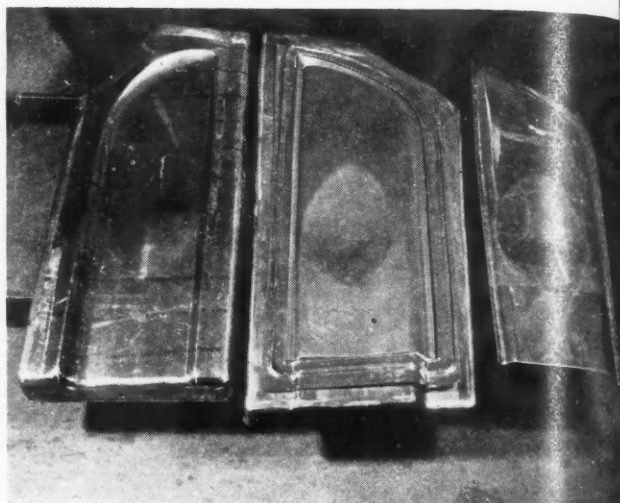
Set of dies used for forming, sizing, and trimming inner skin of door assembly. At the left is the forming die. In the center is the shear die, and at right is the completed part.
